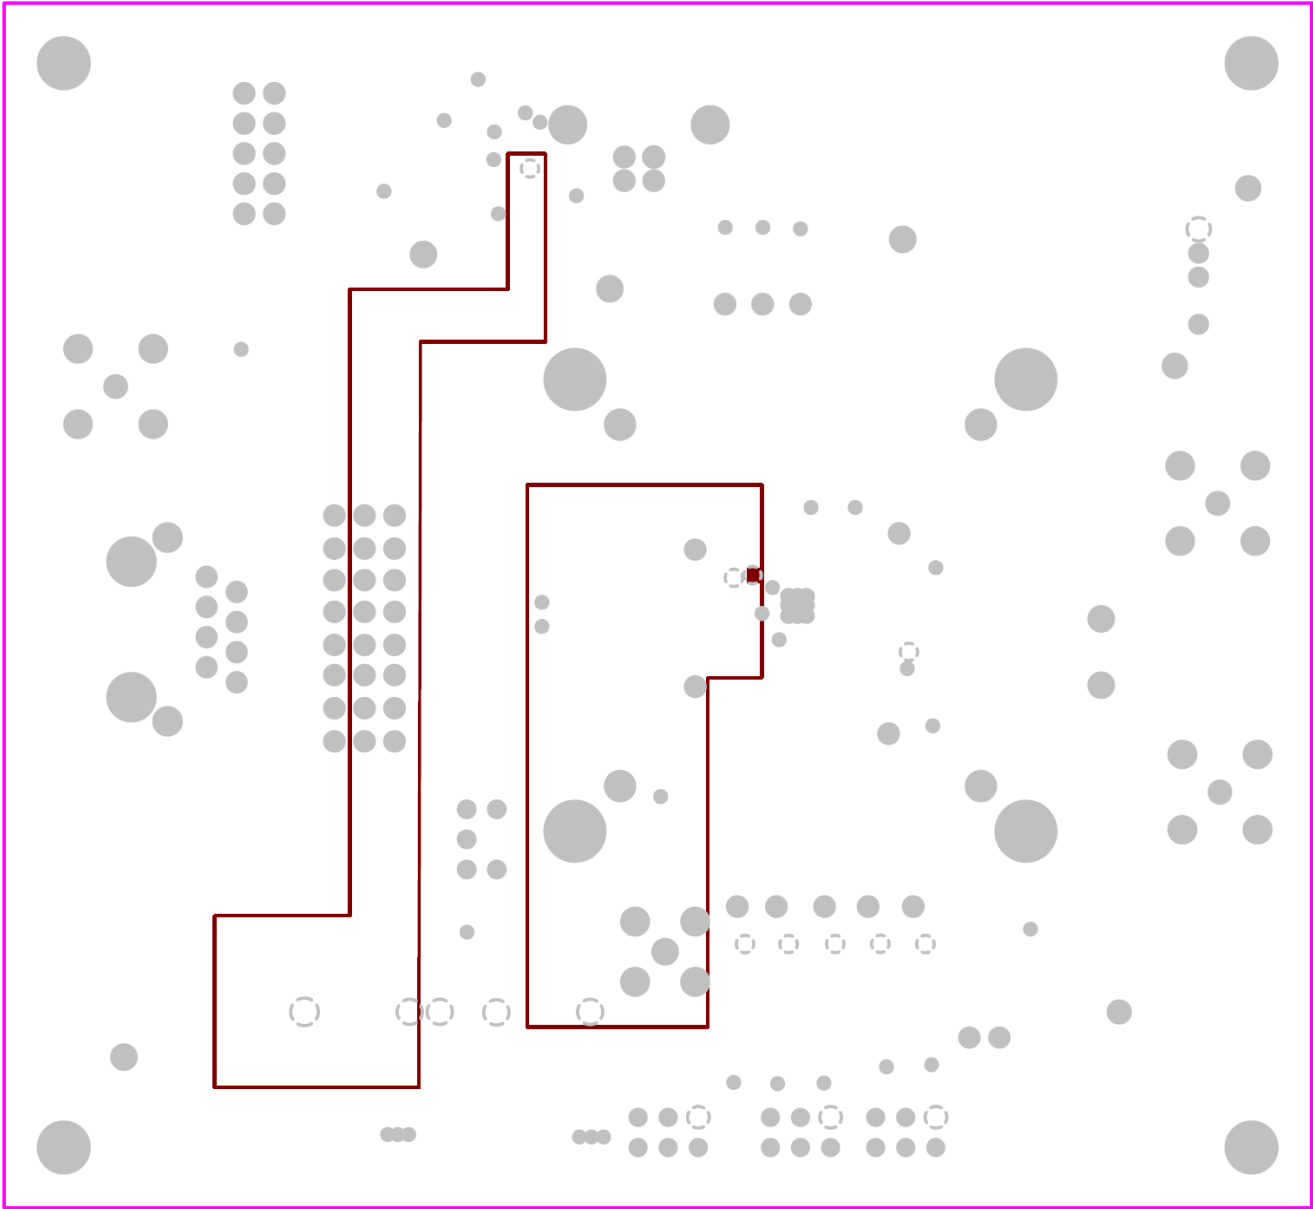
PCB INTERNAL PLANE 2 (POWER)
